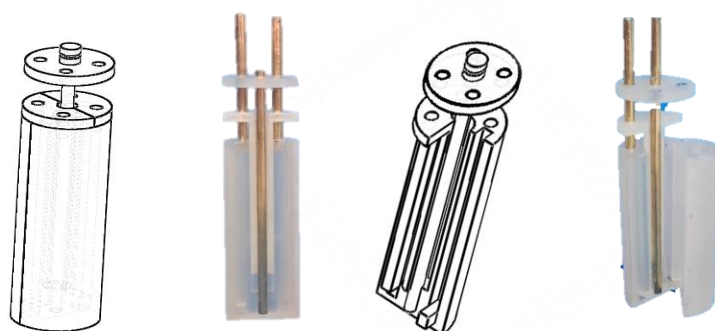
Single actuator chamber 3D printed mould: CAD and obtained models.
